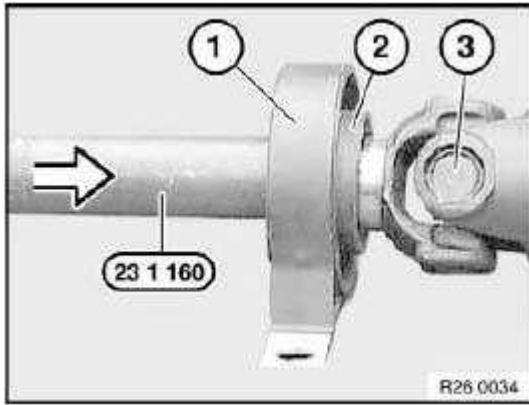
Driving Centre Mount Firmly Home With Special Tool (23 1 160)
